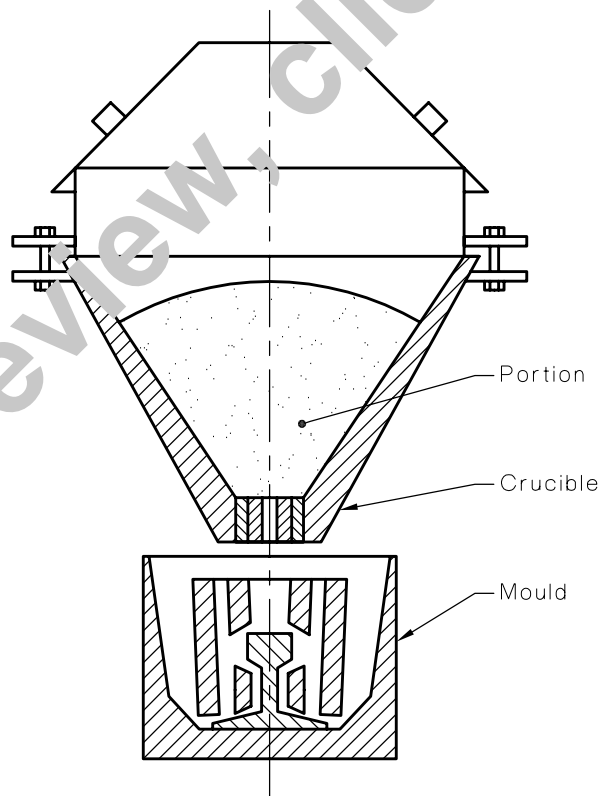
ALUMINOTHERMIC WELDING
